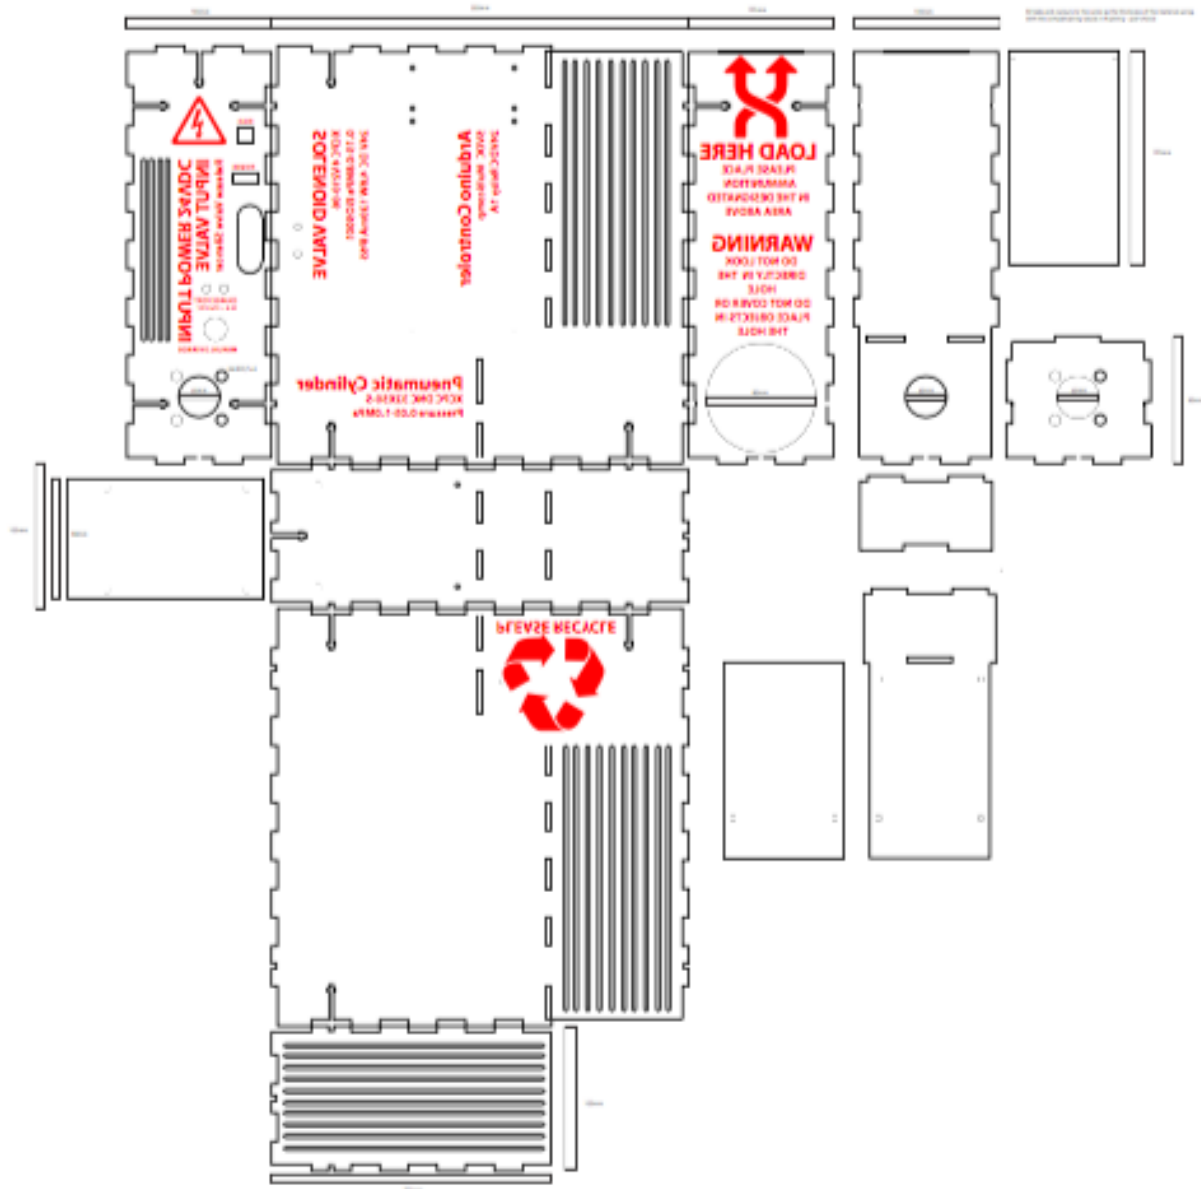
Adobe illustrator - Laser Cut ready for flat pack fold up view
